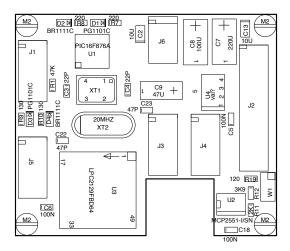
Top side of the SALAMCTRL printed circuit board
